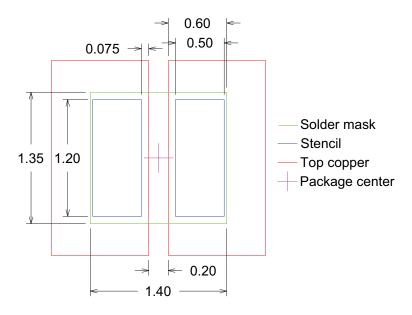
Recommended PCB solder pad layout for LUXEON UV FC2.
